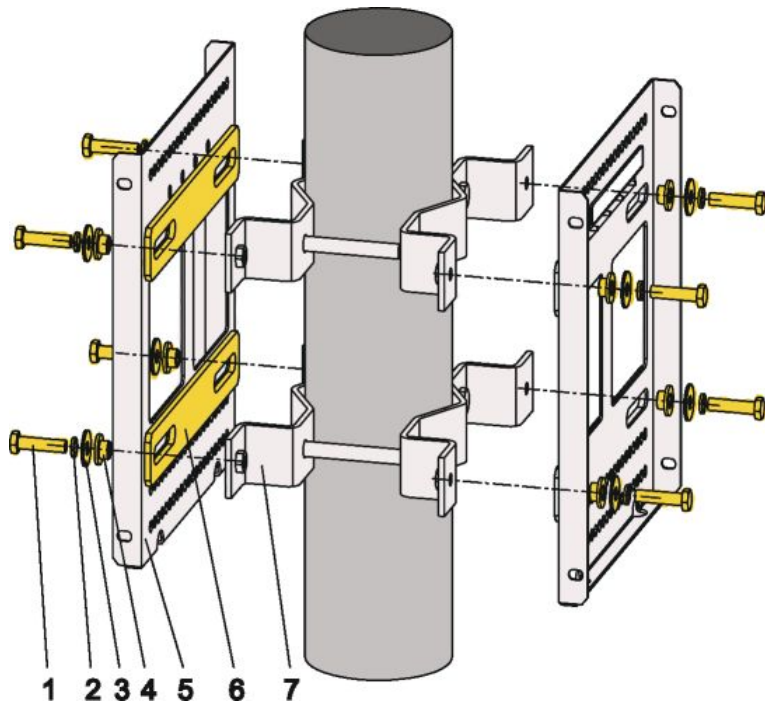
MOUNTING SUPPORTING PANEL (1)
